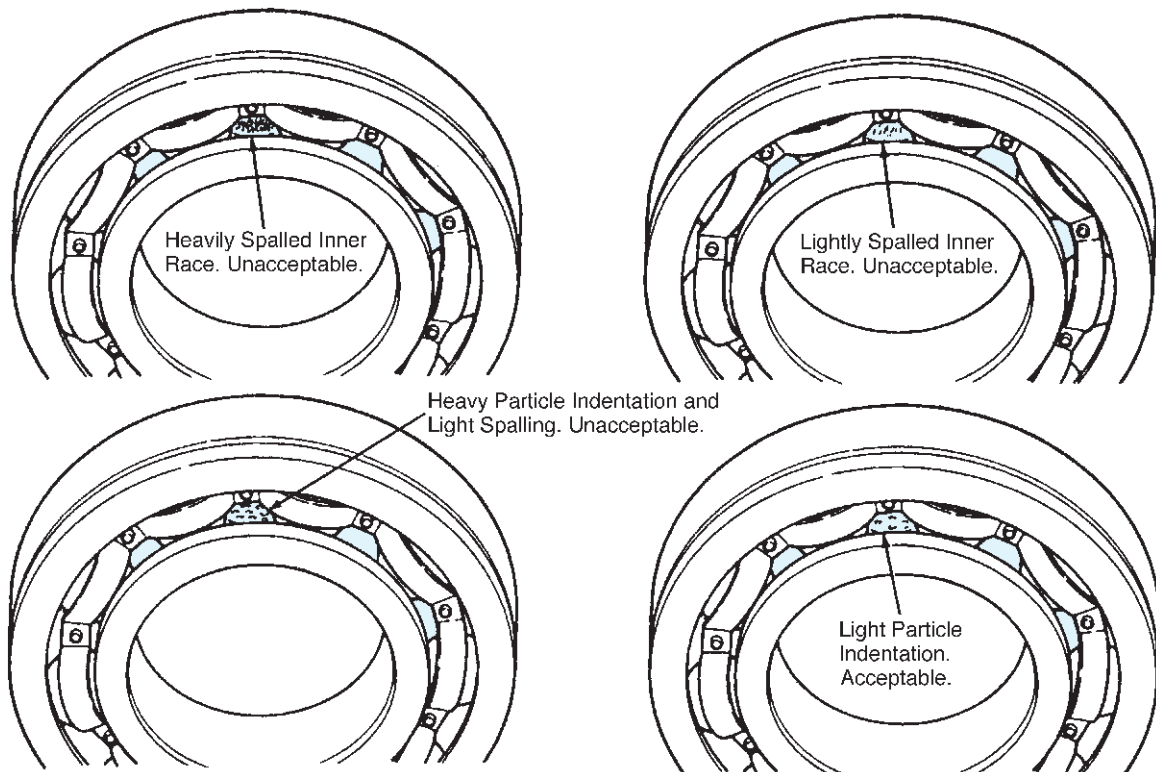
Bearing damage can often be seen under close inspection. (Courtesy of Ford Motor Company)
